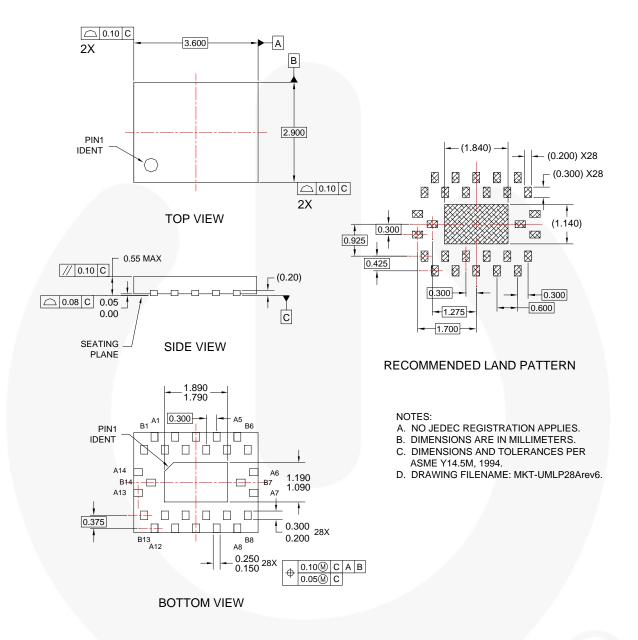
28-Lead, Dual Row, Ultra-thin Molded Leadless Package (UMLP)
